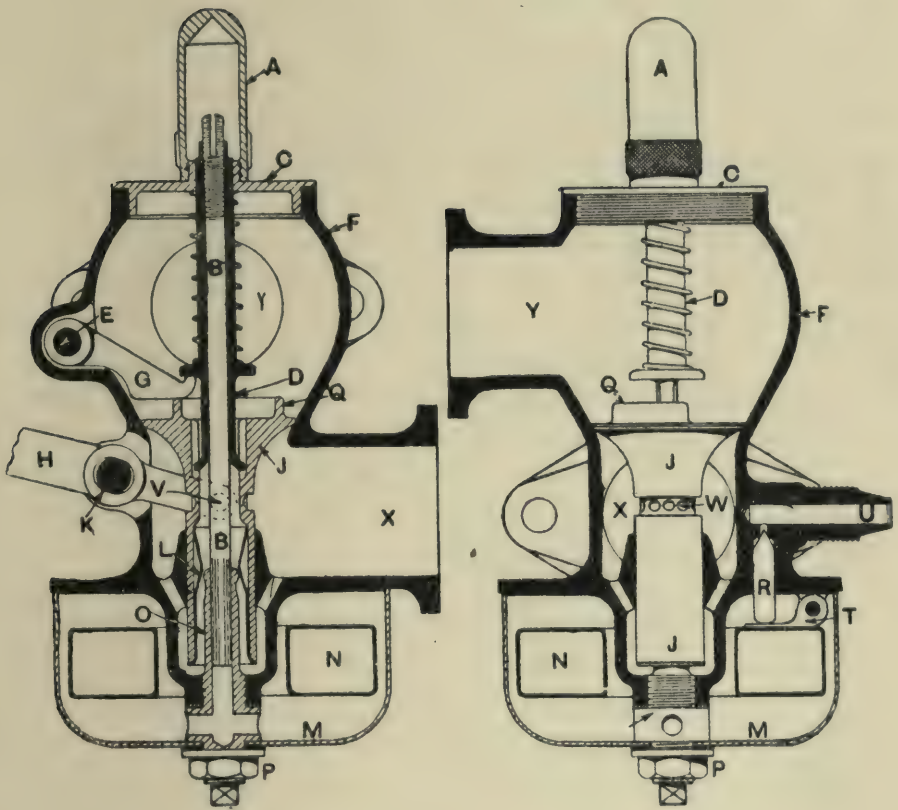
The Vertical Sections of the Brewer Carburettor (diagrammatic).
